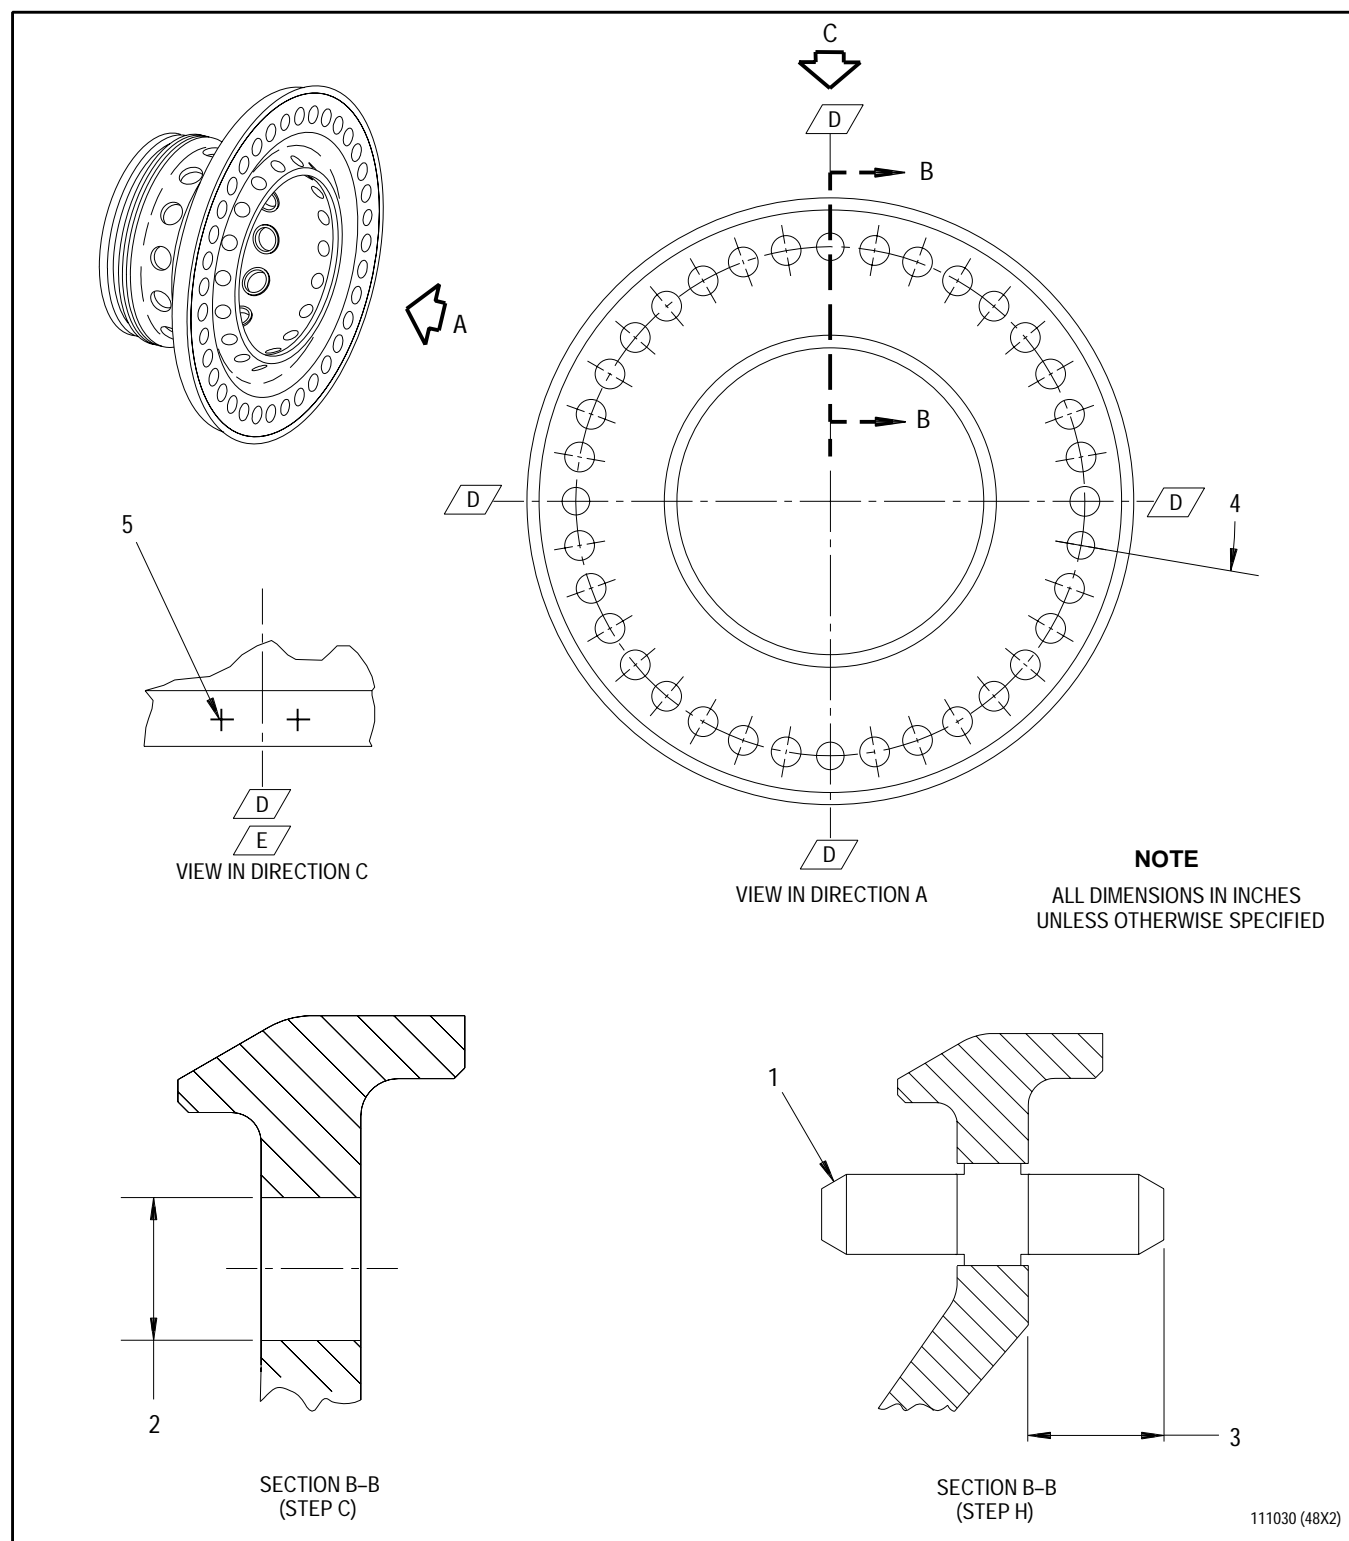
Front Turbine Hub Assembly (Typical PN 4069333) - Replacement of Dowel Pin
